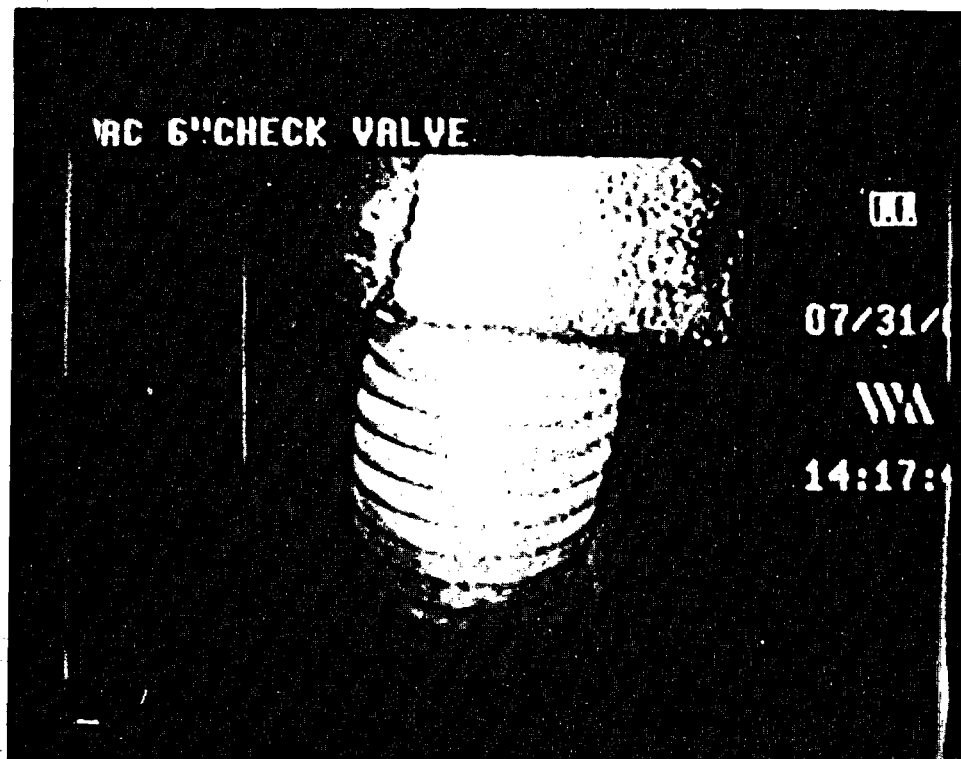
Six-Inch Check Valve In-Service Inspection -- Clapper Stud
